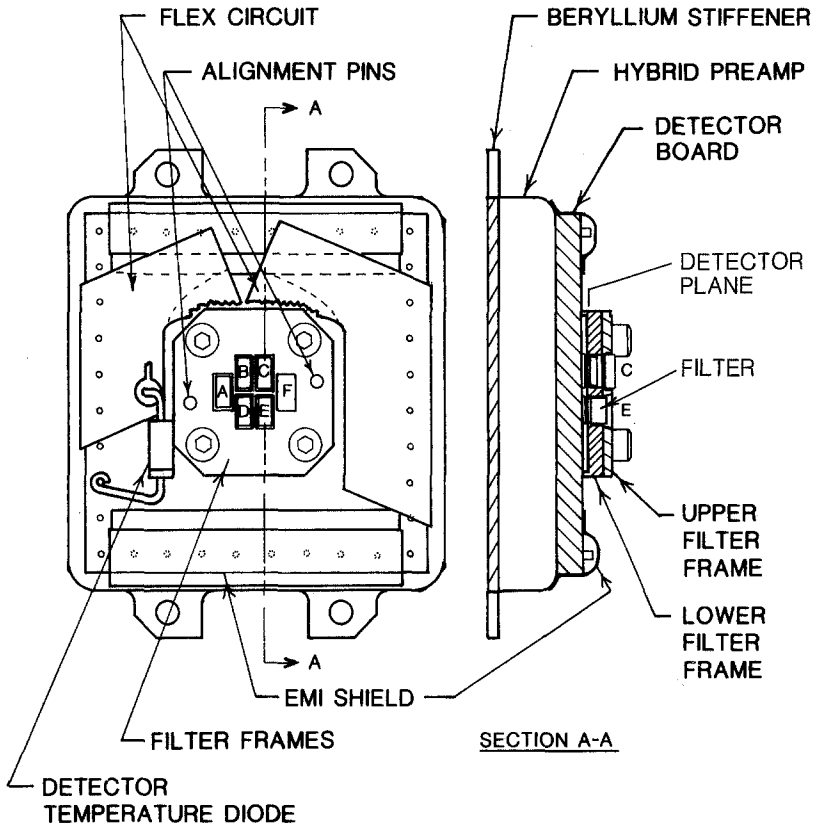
NFR Detector/Hybrid Assembly. This drawing shows a 1" \times 1" detector module bonded to the preamplifier can, which is in turn bonded to a beryllium stiffener. Upper and lower filter frames are shown mounted above the detector array. Note that a stack of two filter elements is used for channel C. The 0.033 cm³ volume enclosed between the filter frame and the detectors (shown in the side view) is sealed and back-filled with xenon.
